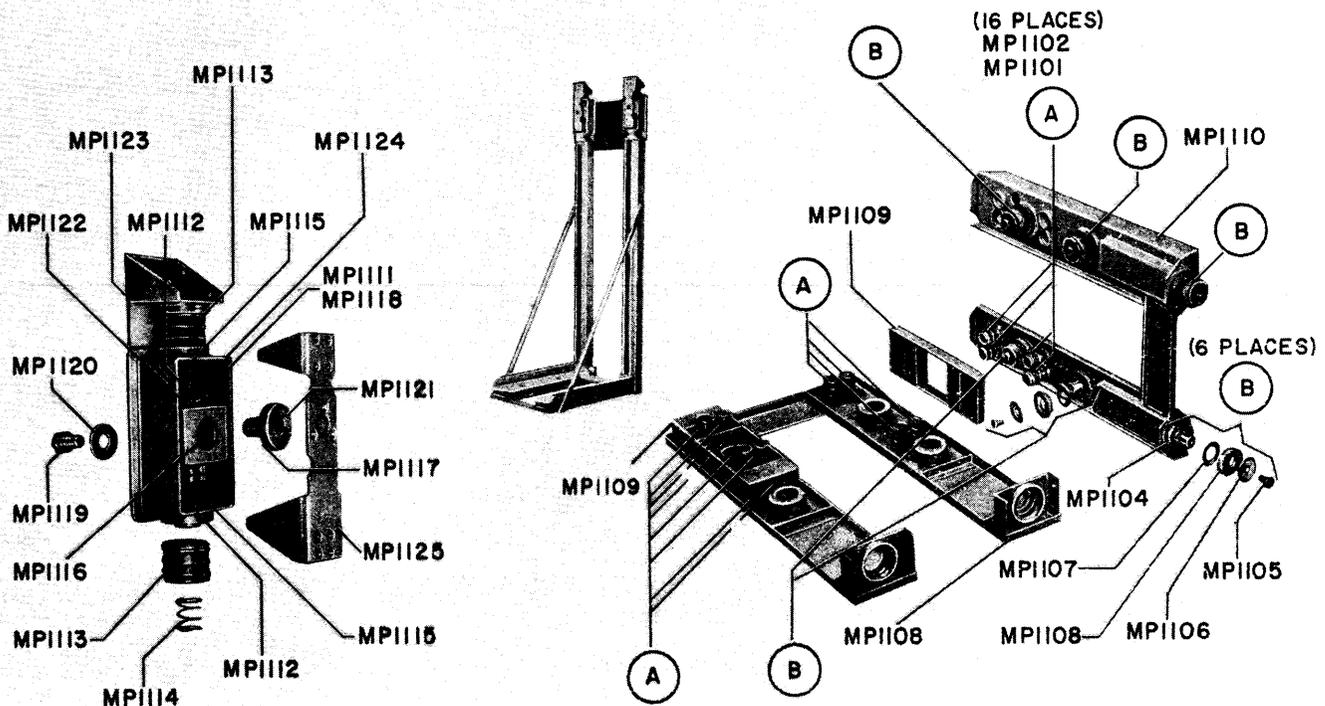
A. Mounting MT-2170/WRT, Location of Parts
